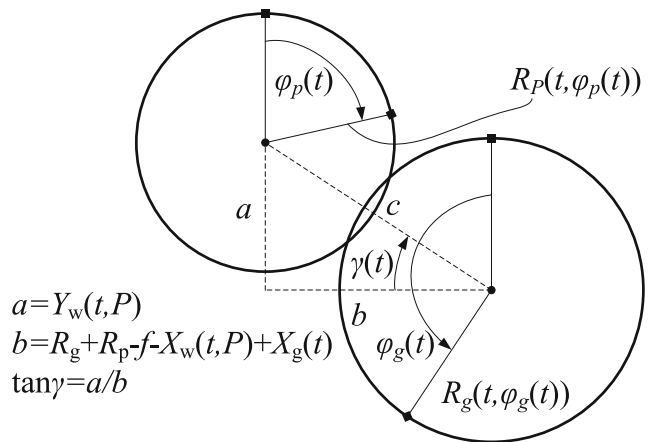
Geometry of the wheel-workpiece interaction where the contact angle depends on the relative wheel-workpiece movement
